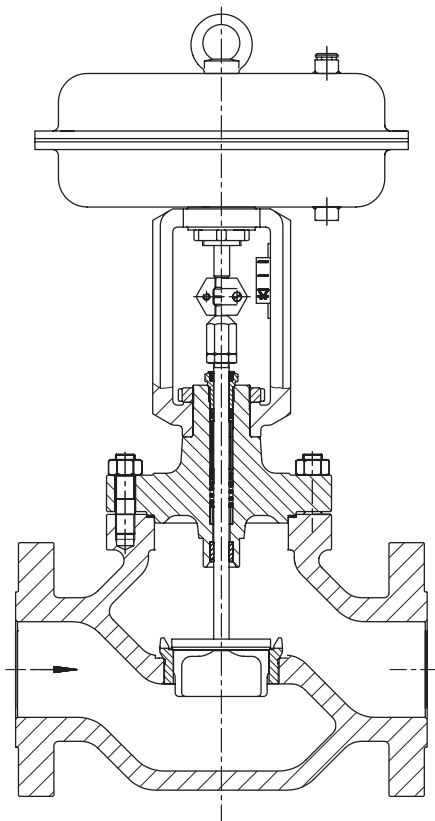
· Type 3251-1 Pneumatic Control Valve with Type 3271 Actuator
